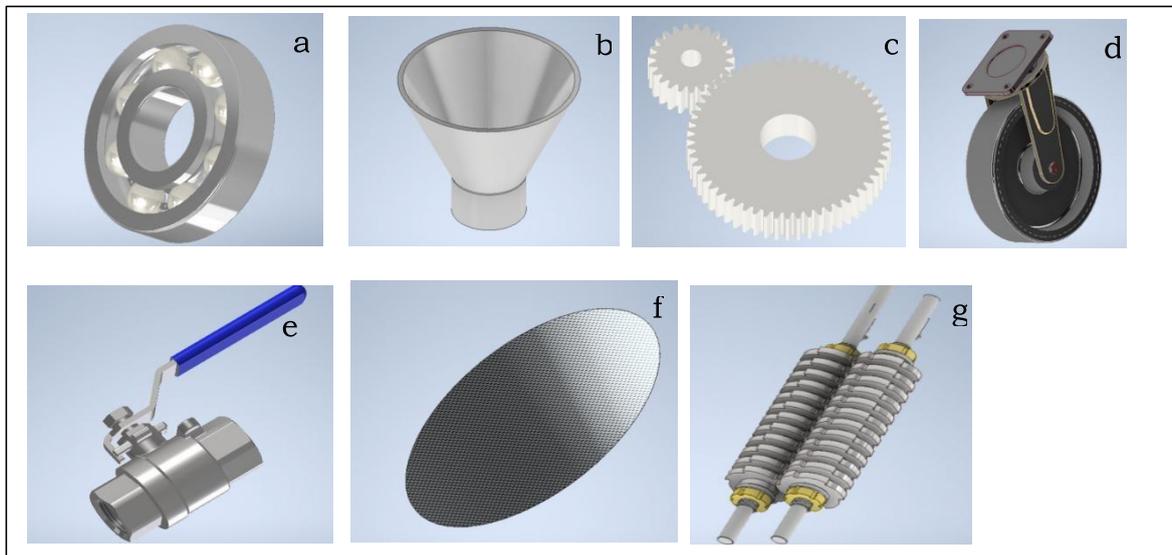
Illustrating the main components of: a. ball bearing, b. funnel, c. gear, d. wheel, e. ball valve, f. sieve, and g. crusher installed inside the Biobin.
